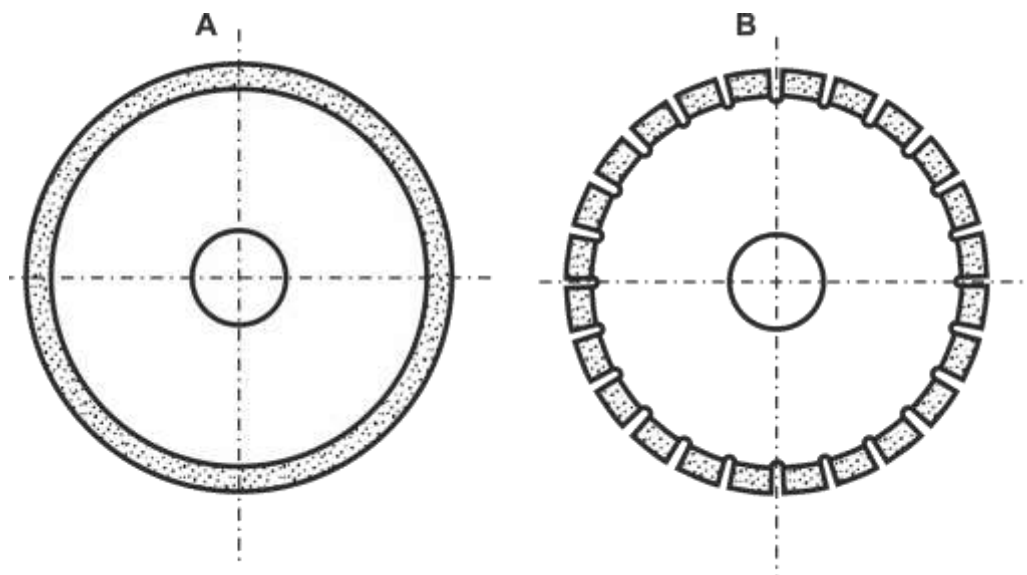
Diamond cutting wheel, A - with continuous circumference, B - segmented
